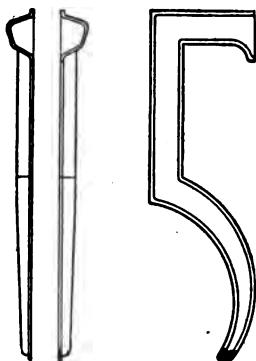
Sectional views of stampings of thin sheet metal with flanges for welding purposes.
